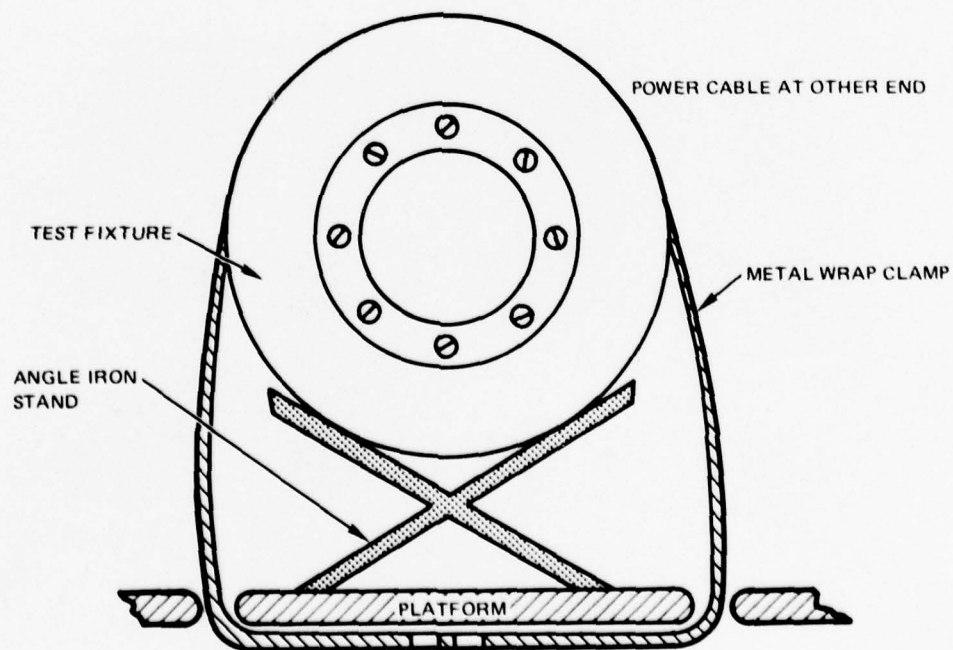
Attachment of single specimen test fixture to the hoist platform; elevation view.
